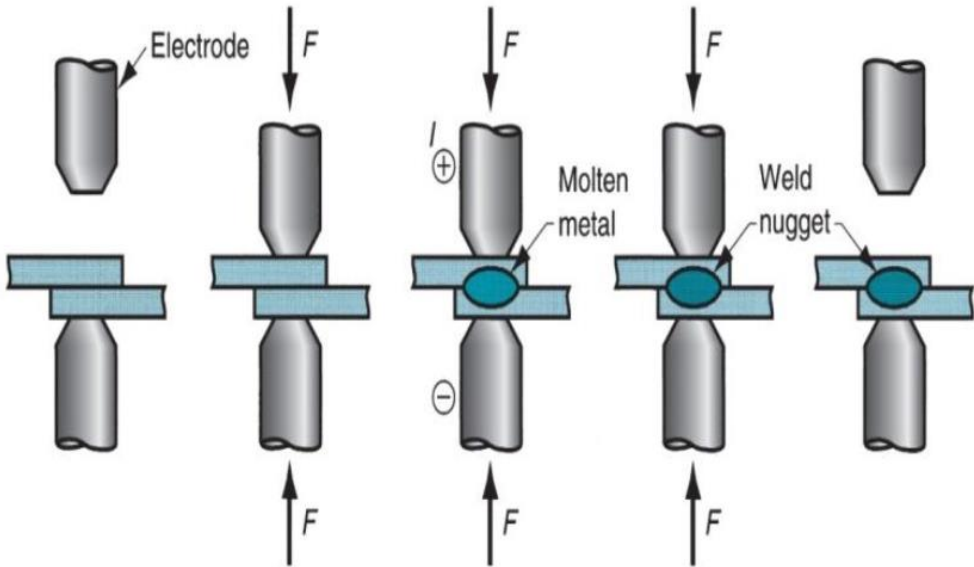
Schematic of the resistance spot welding (RSW) process [44].
